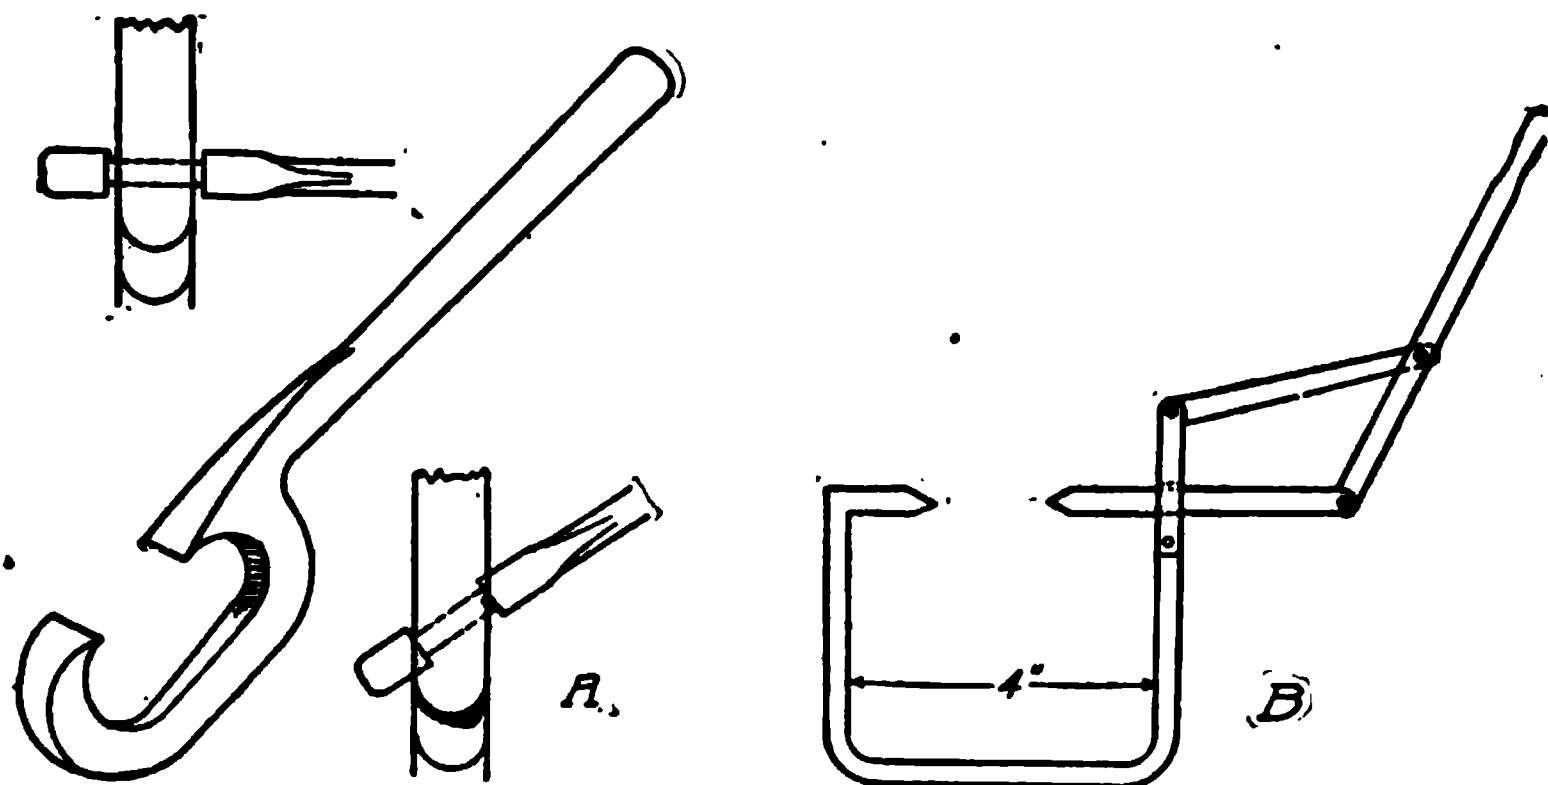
Handy Tools for Spreading Spring Leaves to Insert Lubricant
